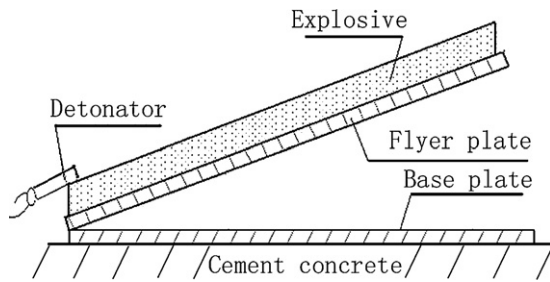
Schematic view of experimental set-up in explosive welding.
